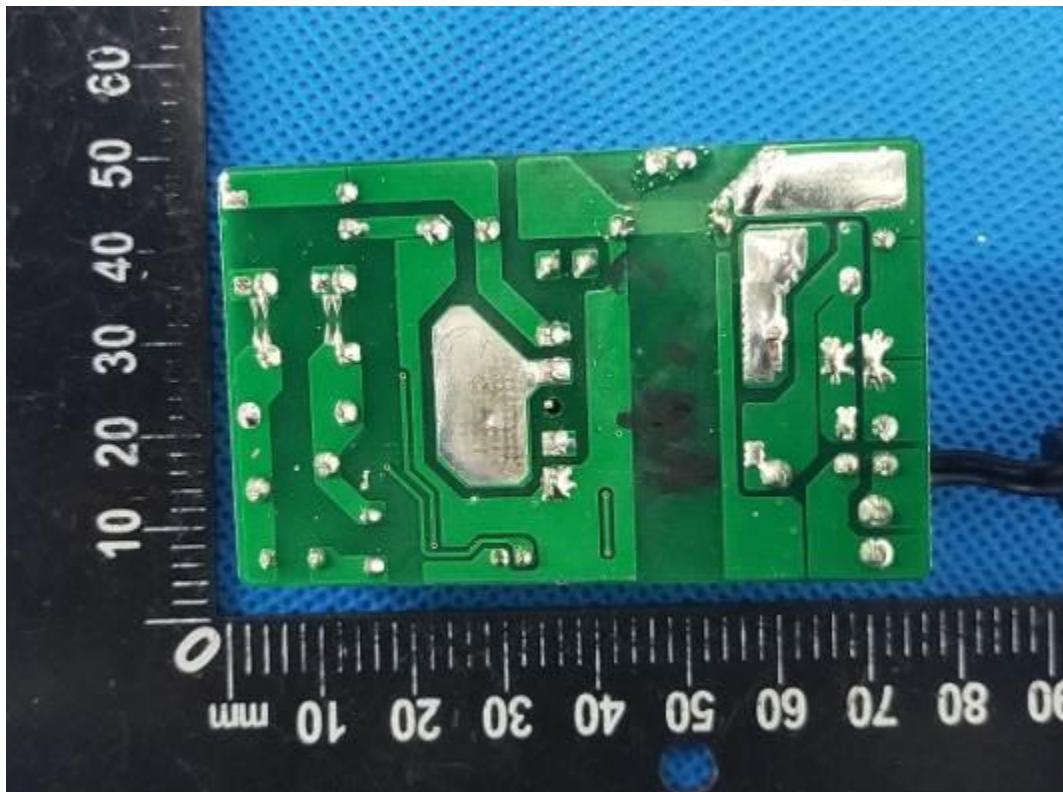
PCB trace side view (PCB layout DYS830A-P01)
